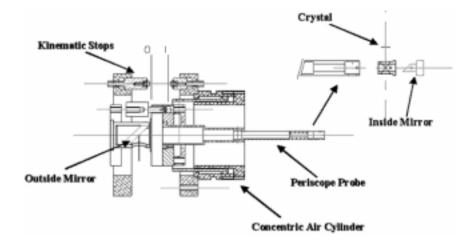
This cross-section drawing shows the probe assembly and actuator. In this plan view the electron beam would be traveling from the top to the bottom of the page. The vacuum bellows and chamber mounting have been omitted from this view but are shown in Figure 3. The inset to the figure shows how the crystal and inside mirror are fitted to the inner end of the probe.
